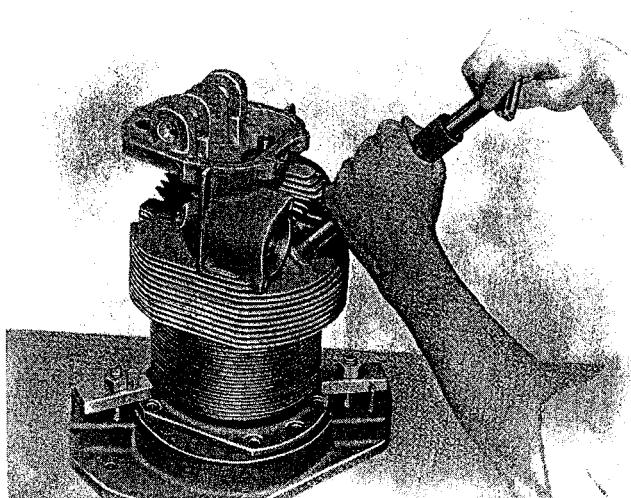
Expanding Spark Plug Hole Helical Coil Insert.
